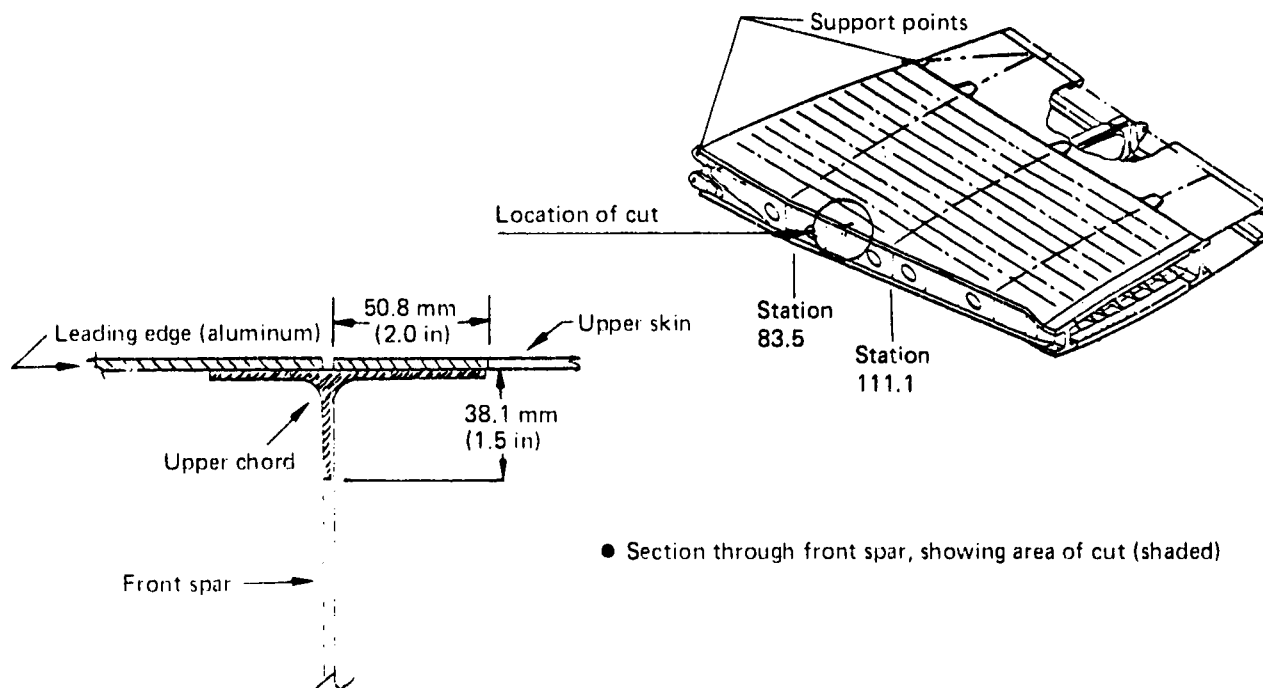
Stuh Box Damage Tolerance Test—Front-Spar Upper Chord, Skin, and Leading Edge
